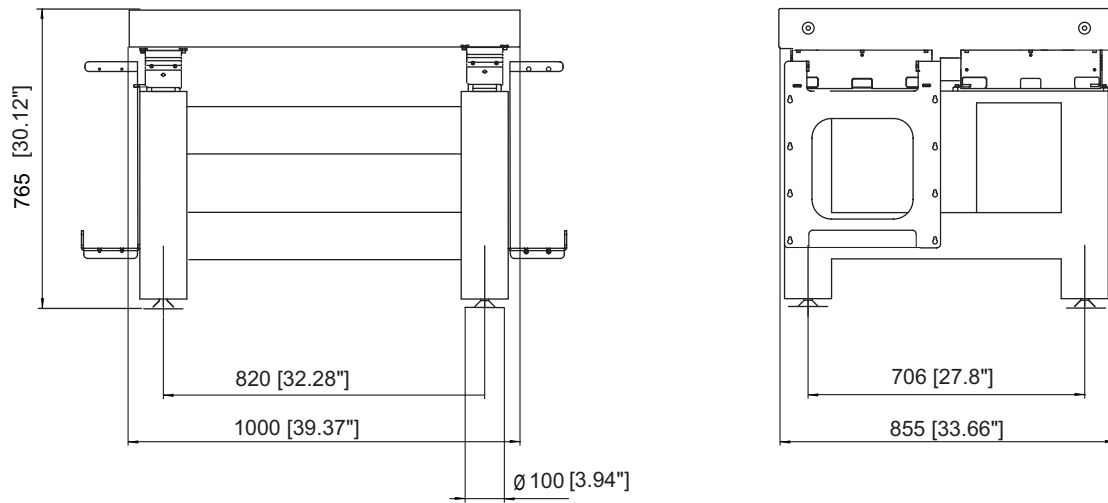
Front and side view of the optical table A-TAB-ELC-01 incl. lateral console (Dimensions not specified are given in mm.)
